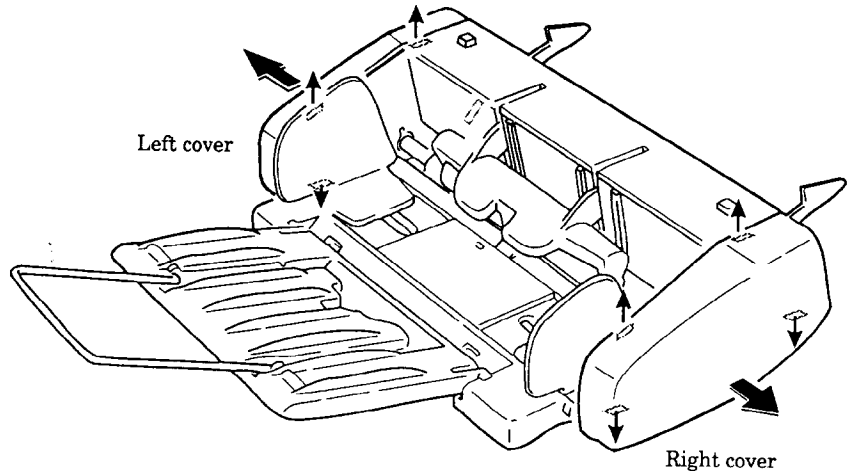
REMOVING THE UNIVERSAL FEEDER FROM PRINTER
